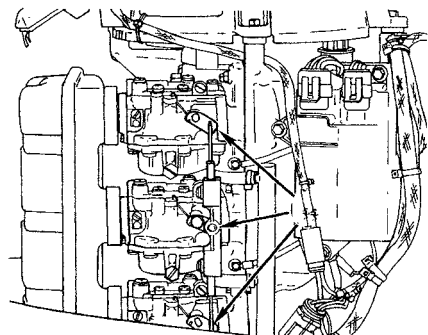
Carburetor linkage lubrication points for 25/35 hp (500/565cc) 3-cylinder motors
